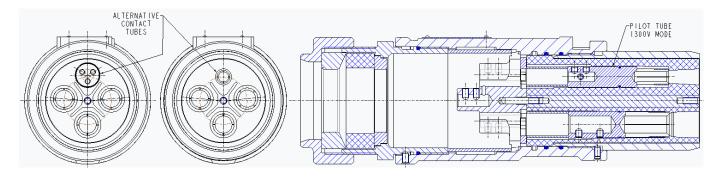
TYPICAL PLUG ASSEMBLIES IN 1300V MODE
